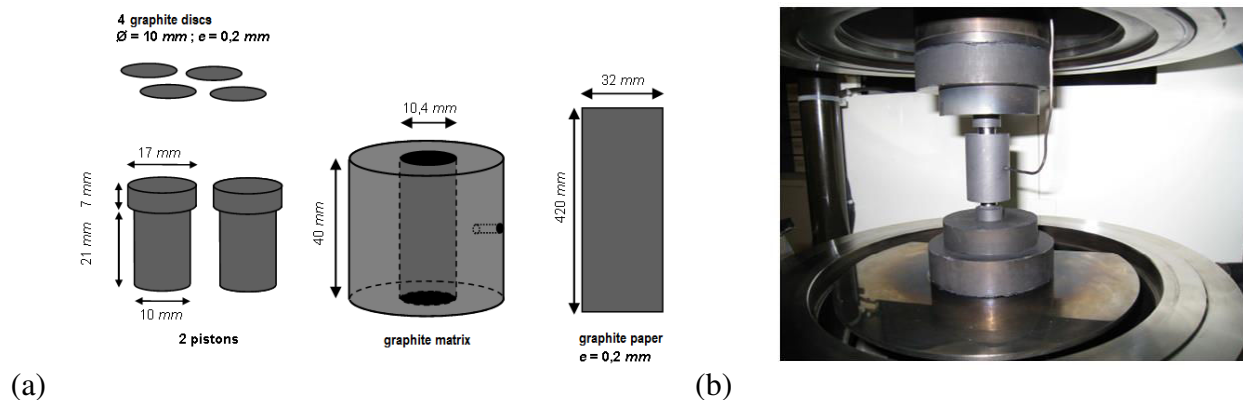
(a) Scheme of dies, punches and graphite foils used and their dimensions illustrated for an inner hole diameter of die of 10.4 mm, (b) photograph of the matrix installed in the sintering chamber. The thermocouple is inserted into the side hole for controlling the temperature the closest to the powder.
